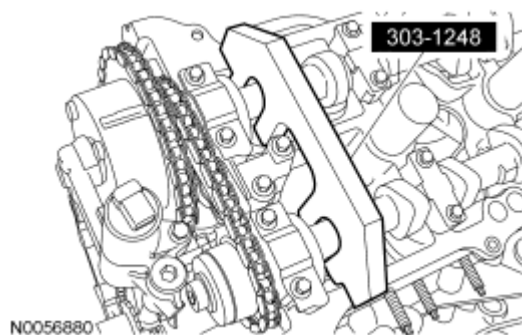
Installing Special Tool (303-1248) Onto Flats Of LH Camshafts
